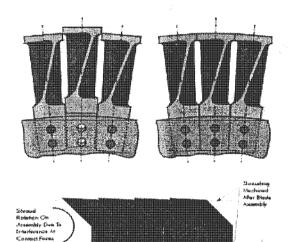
Installation of Rotating Blades with Integral Shrouds
